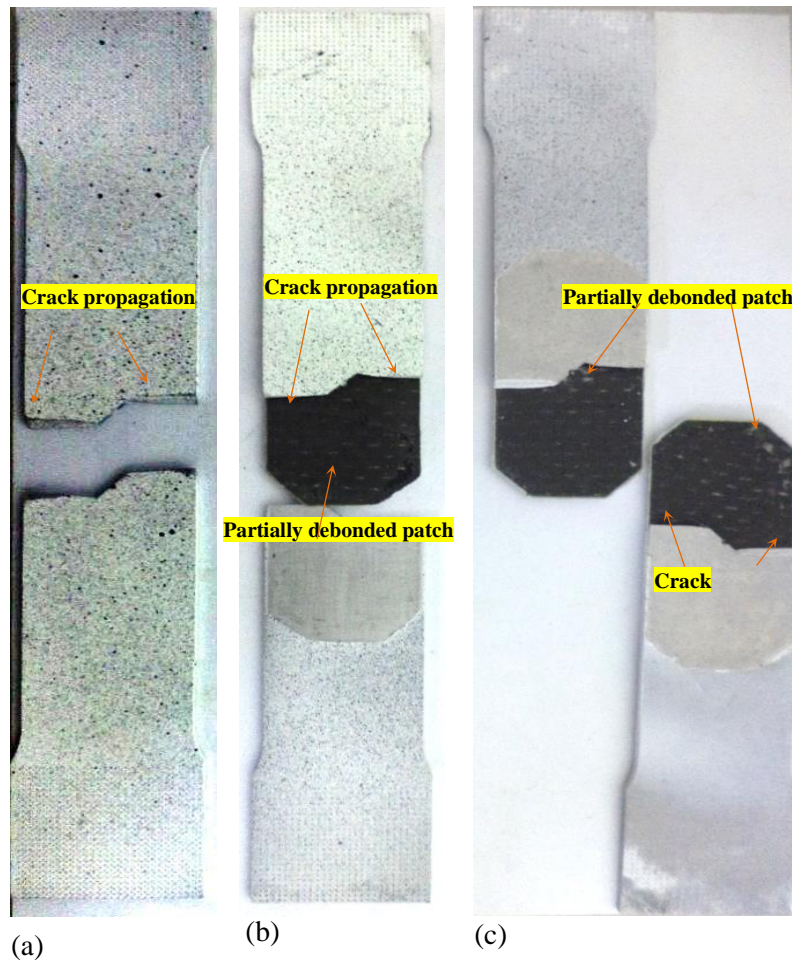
Fracture mechanism (a) cracked panel (b) single sided repaired panel (c) double sided repaired panel
